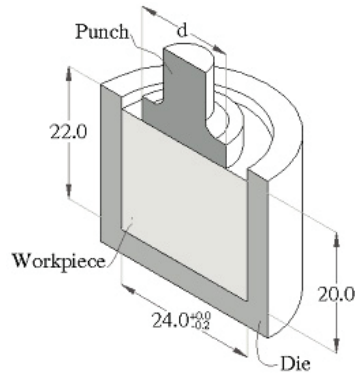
Geometry of die, workpiece and punch, measurements in mm
